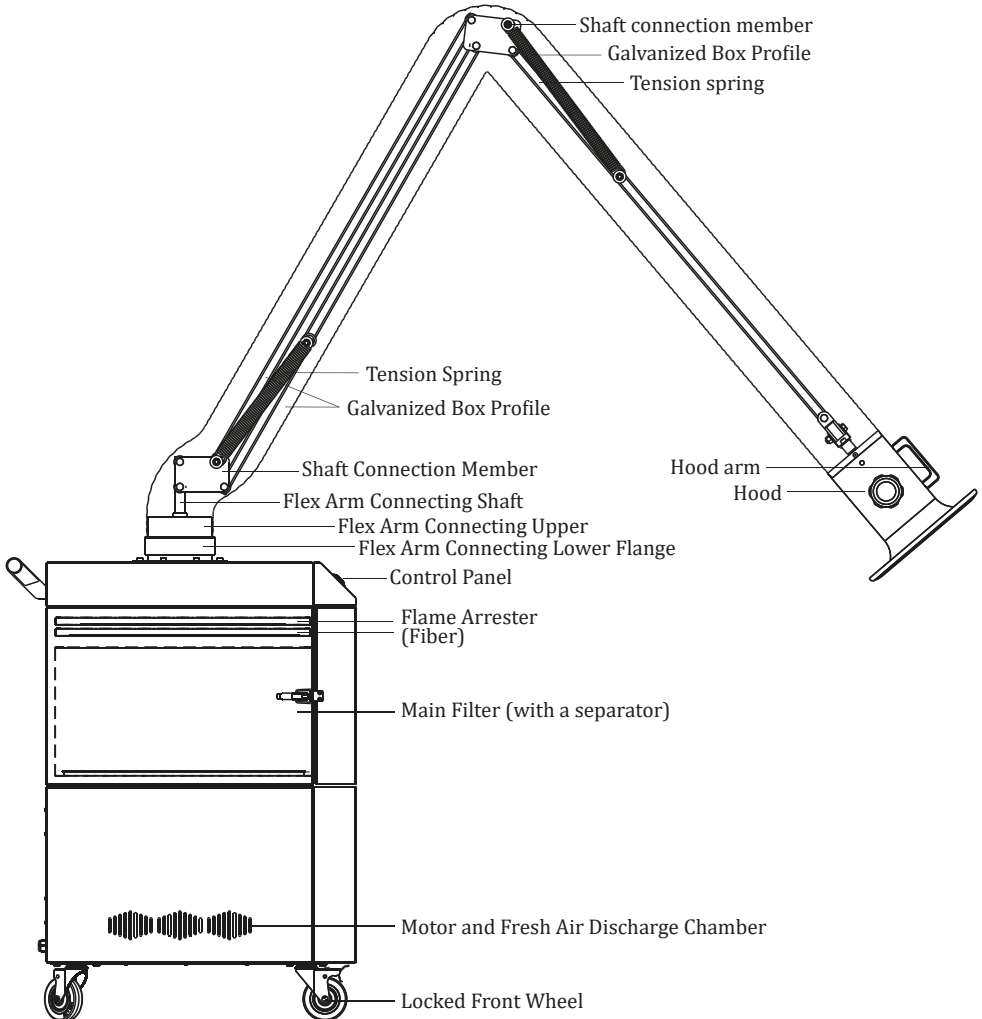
Inner Structure And Assembly Of The Flex Arm
